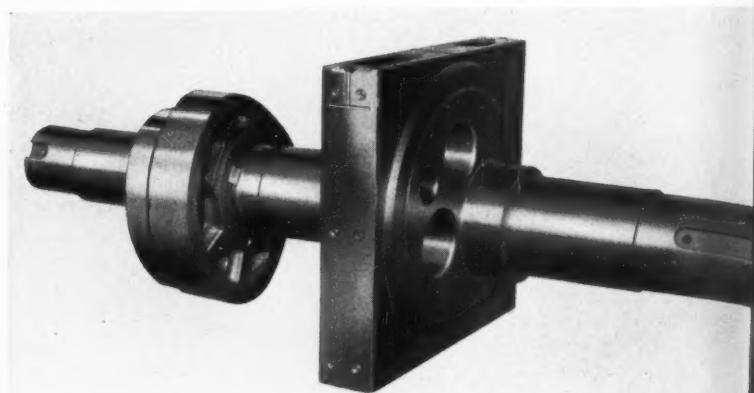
Assembly of suspended header slide and eccentric mainshaft. Large bearing area of latter reduces pressures and bearings are located closer to center line. Cams actuate toggle mechanism which moves gripping dies.
